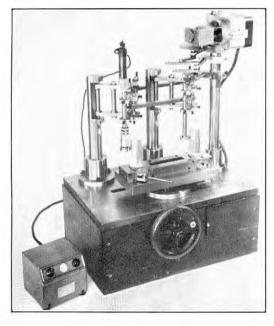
Apparatus for Inspecting Turbine Blades; Aeronautical Inspection Directorate.
